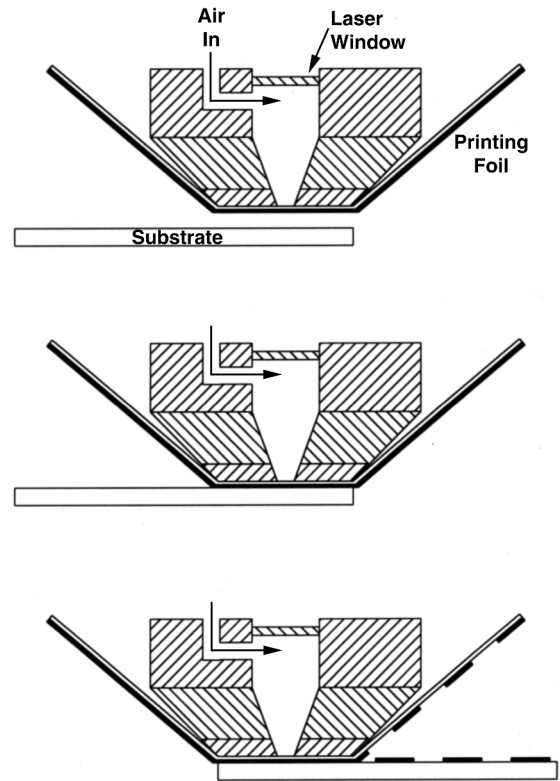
Final print tip, raised (top), lowered (middle), and after printing (bottom)
